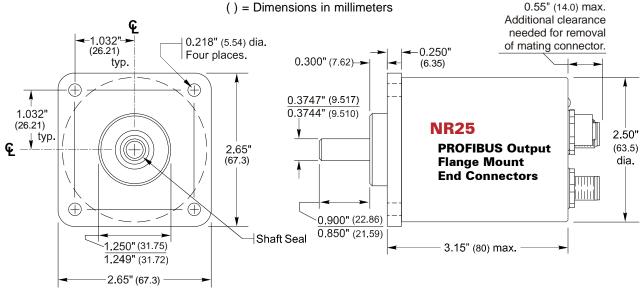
Flange Mount, End Connector, Aluminum Body Outline Drawing
